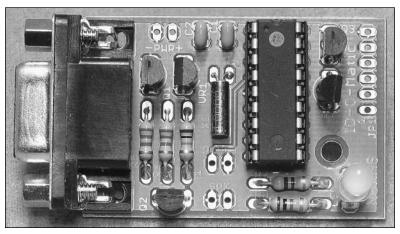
This version of the ID-O-Matic is built from a kit offered by www.hamgadgets.com. The parts count is low, and it can easily be built on a prototype board.
